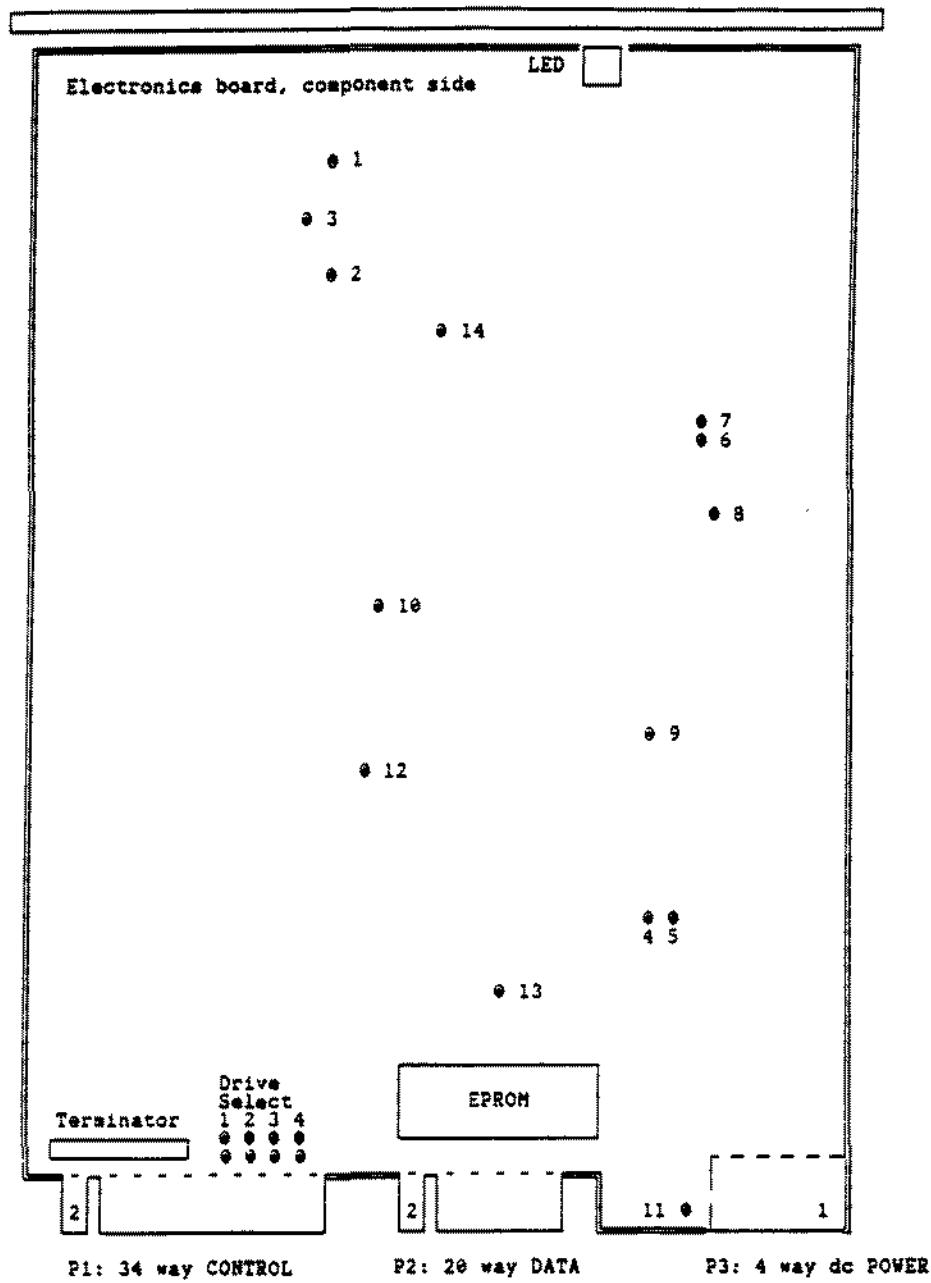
70 MEG Rodime 5090 5 1/4" ST506 Hard Drive
